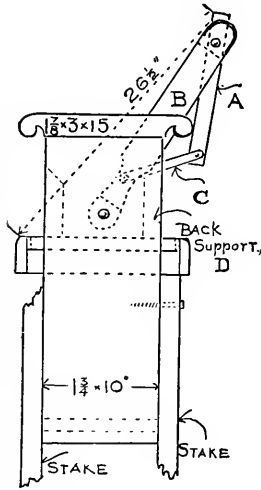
End View of Garden Bench with Reversible Back—Scale  $\frac{3}{4}$  in. to the Foot.
